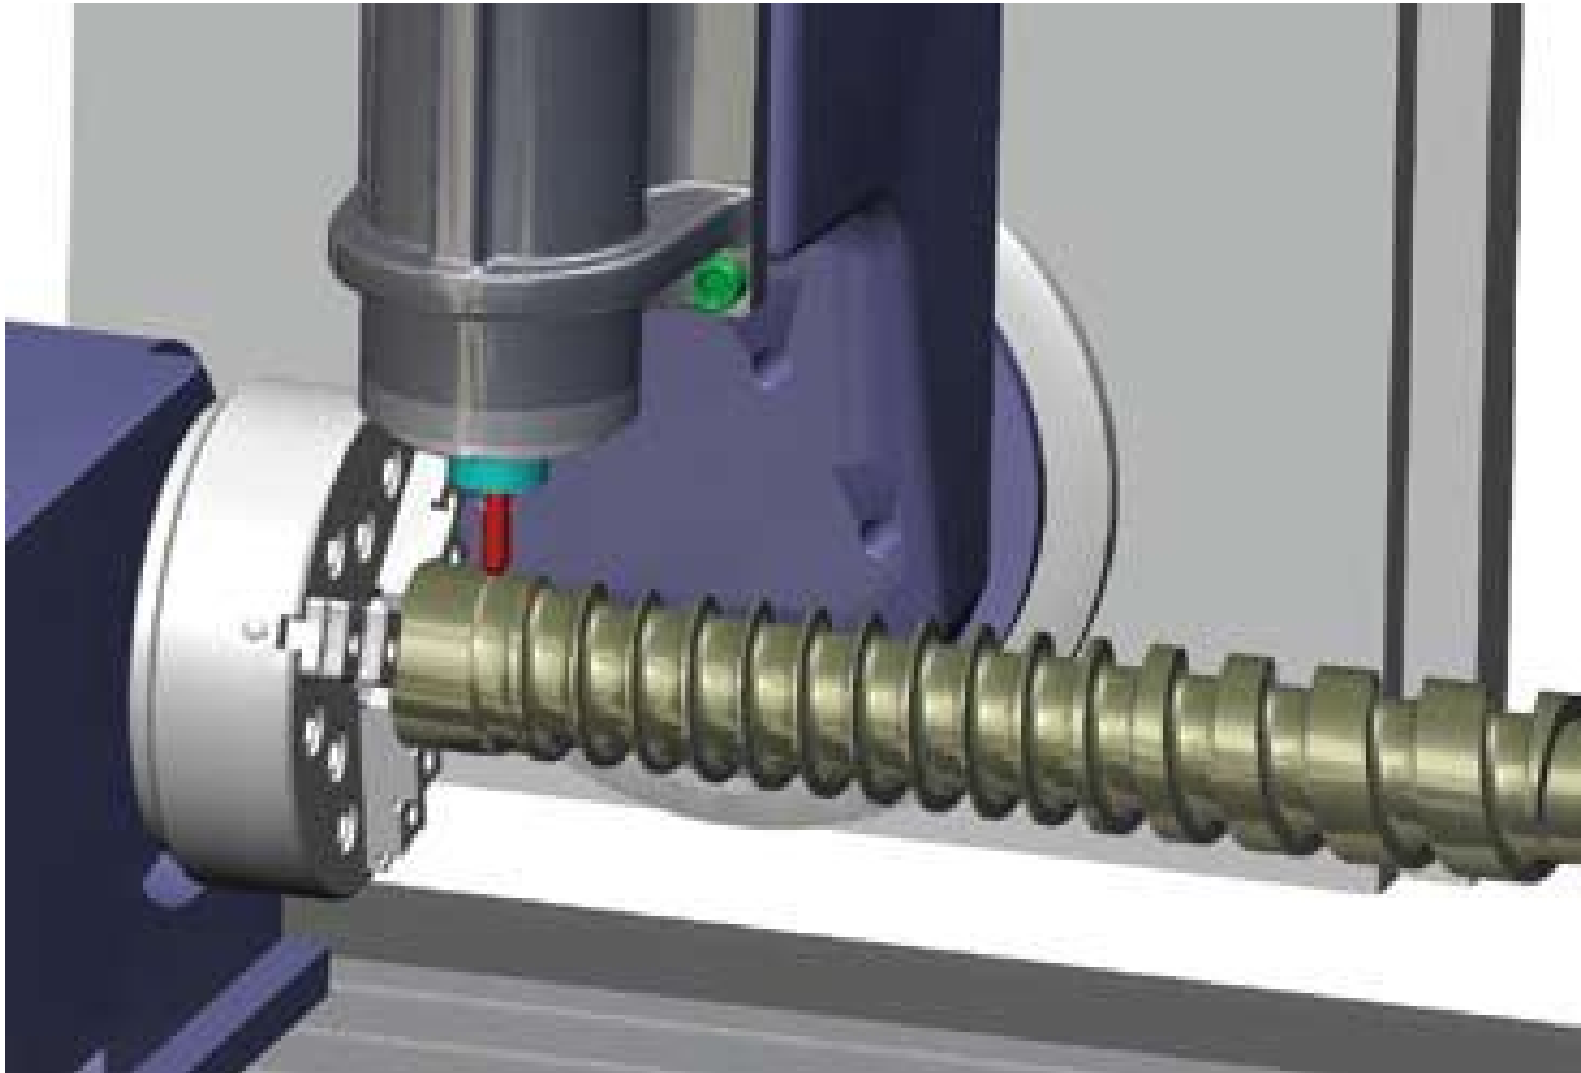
A 4-axis machine set-up for cutting a variable-pitch thread on an auger using motions on XYZ and A axes.
